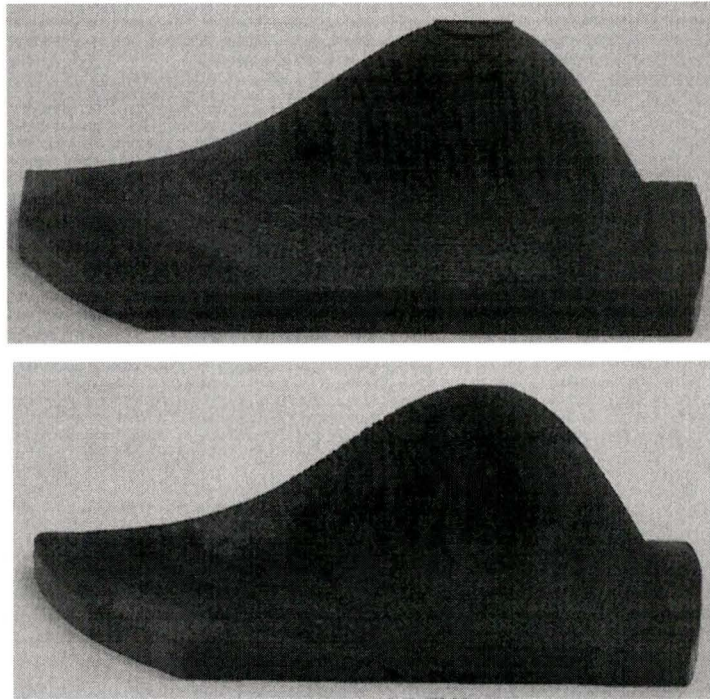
Machined Freeform Convex Surfaces (Top to Bottom): SDIC, Isocusp
